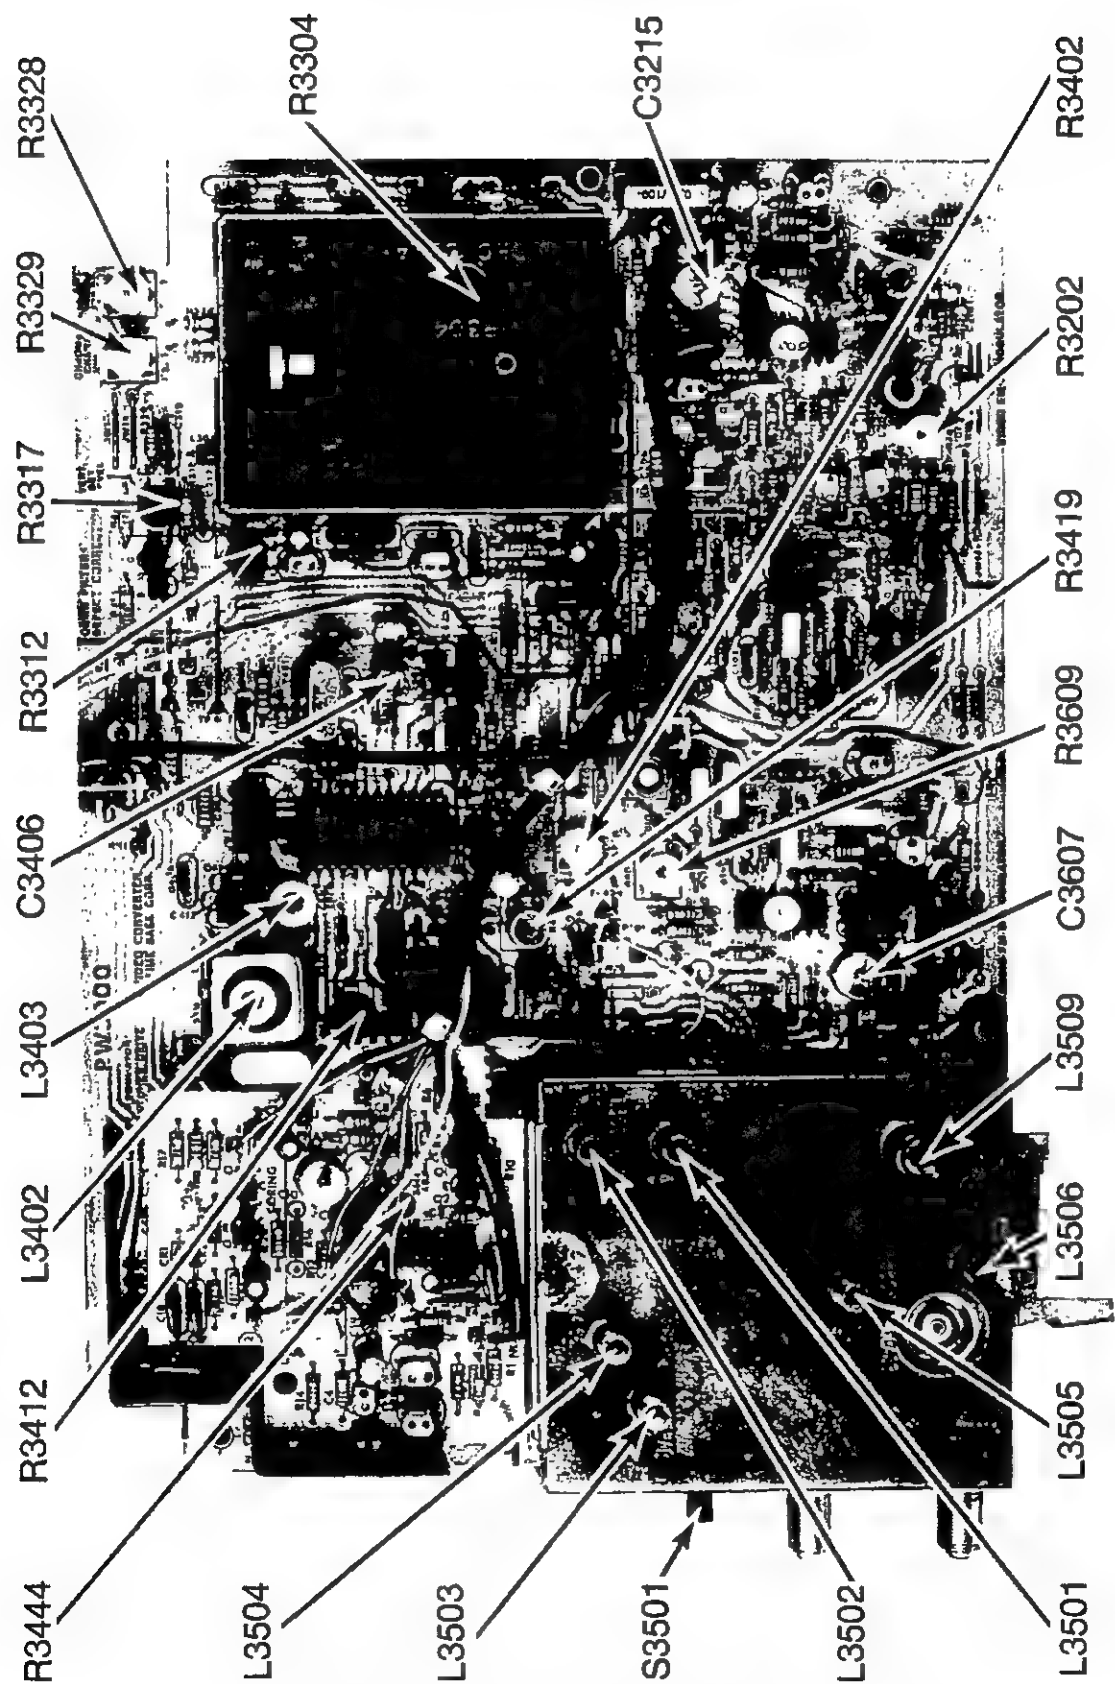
PW 3000 Circuit Board Electrical Adjustments
